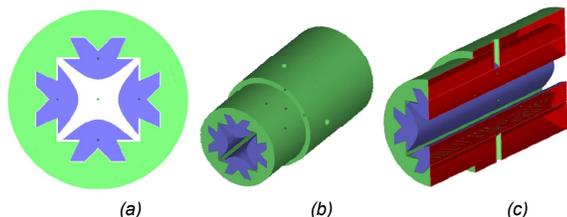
CAD fabrication drawings for DLP LIT assembly a) 2D top view (green – LIT housing, blue – LIT electrodes), b) 3D view, c) 3D cross section.
